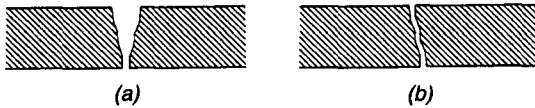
Combination of sheet ends profile in a butt welding
